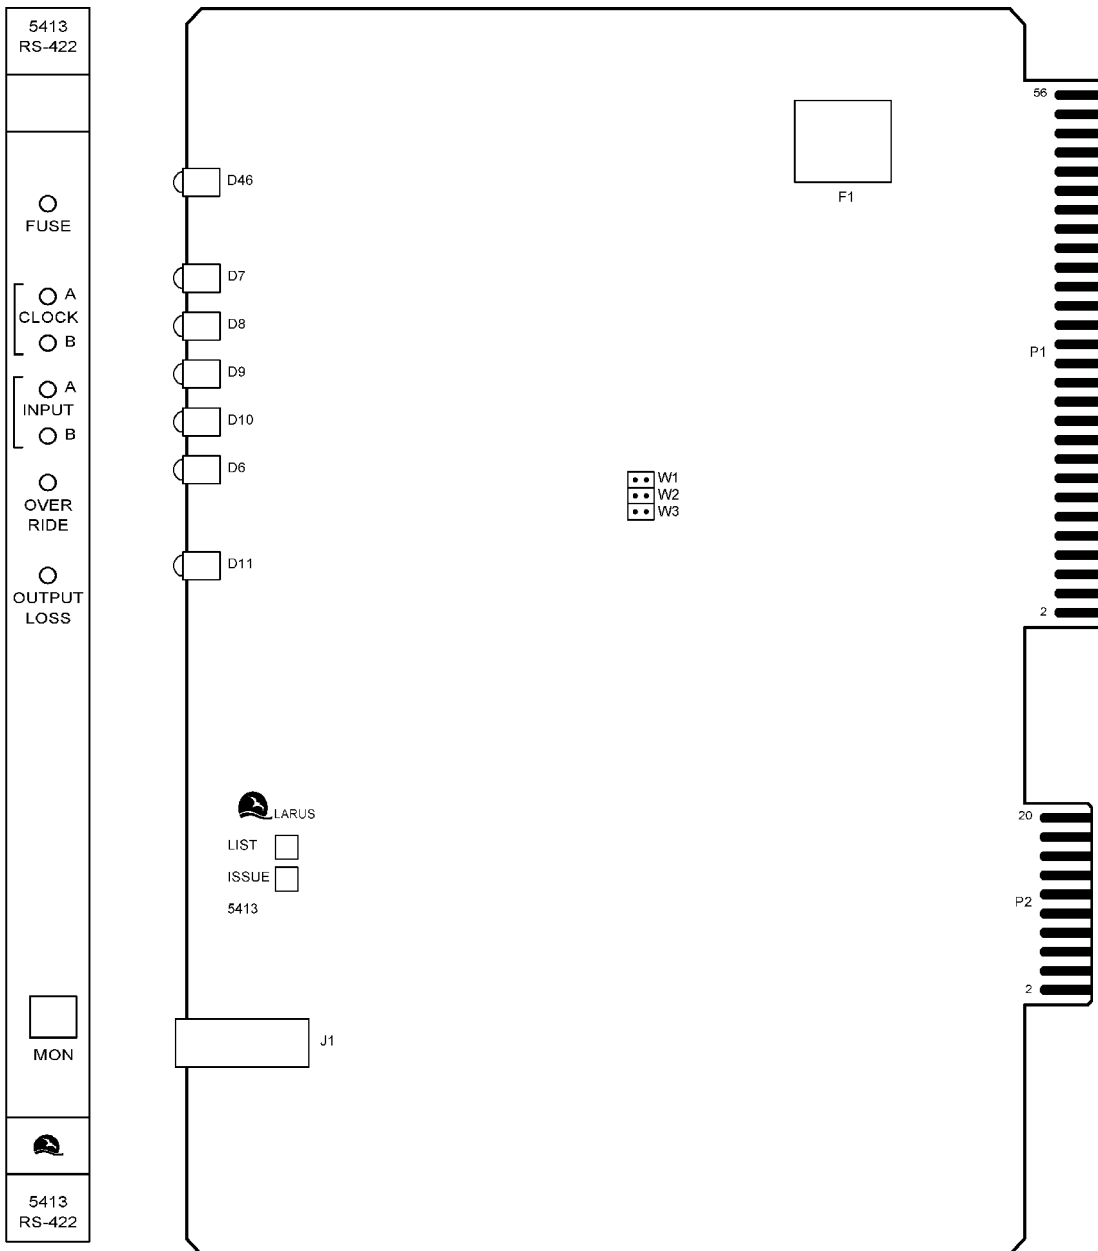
Model 5413 EIA RS-422 Output Driver Card with Front Panel
